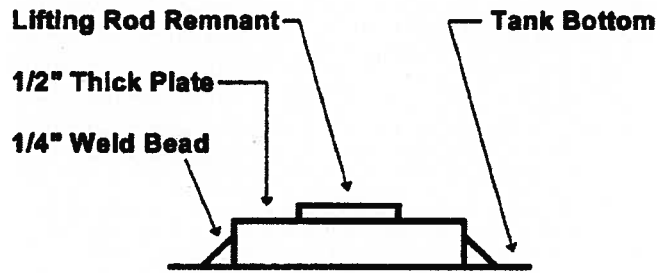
Lifting Plate Elevation View. (Not to Scale)
